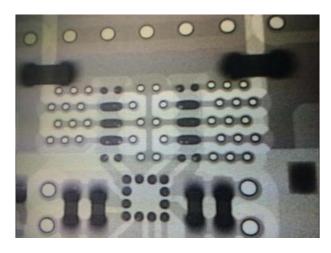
X-ray of a board showing the EPC2019 and the LM5113 driver. The image shows voiding in the solder bars and uneven looking joint shapes in the EPC part and driver. This is example of possible solder paste volume or reflow issue.
